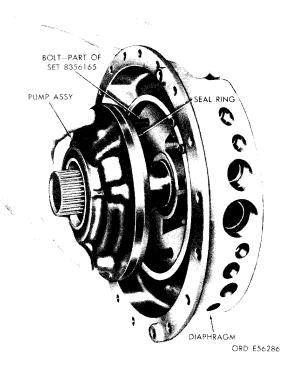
Installing front oil pump assembly (bolt is part of set 4910-572-8710 (8356165)).
